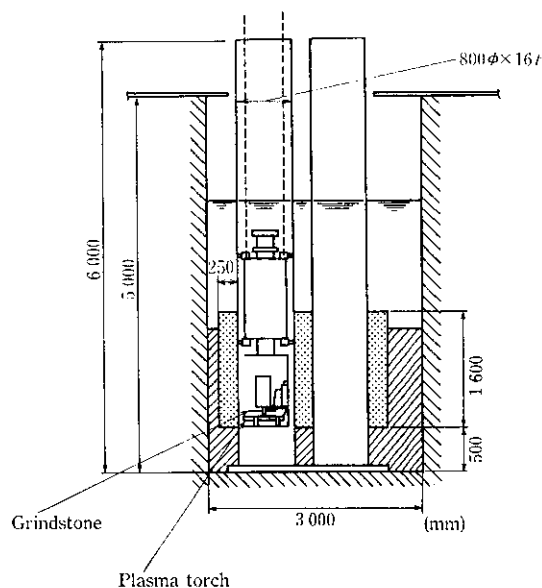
Configuration of underwater cutting experiment using the cutting machine
